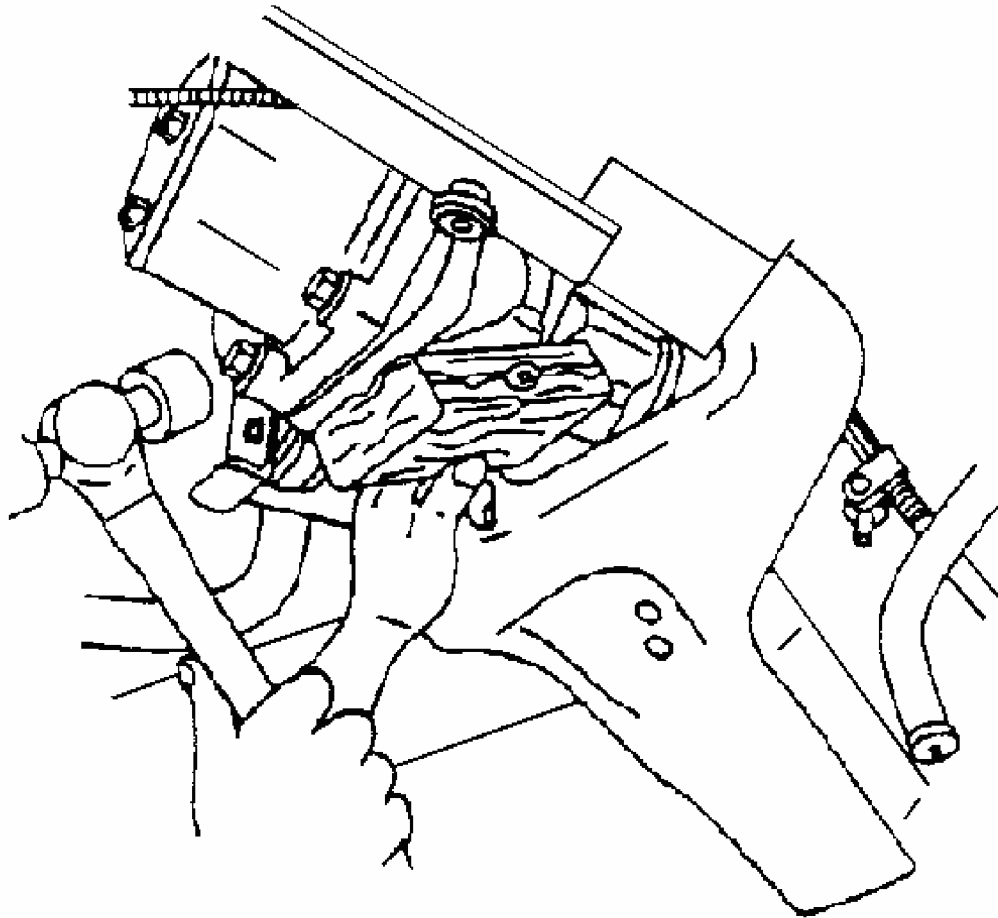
Disconnecting Left Side Wheel Drive Shaft From Differential Carrier
